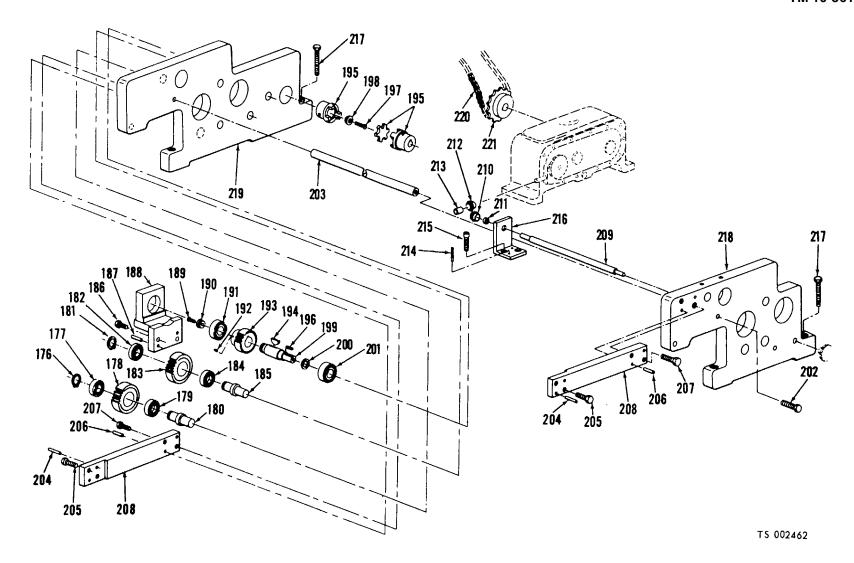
Feeder assembly (Sheet 4 of 5)
